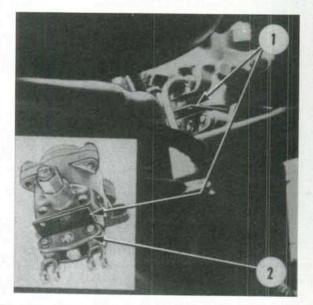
View of Ford brake adjusting tool No. 7446 (1) installed between rocker arm links (2) and valve body. See text for brake adjustment on Model TW-35.
